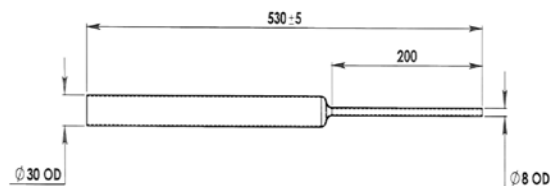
Drawing of the quartz tube designed to hold a 55x20 mm target plate.
